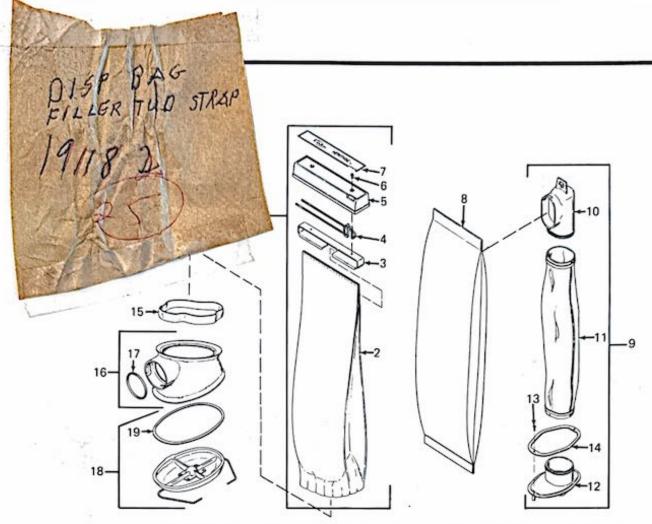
HERITAGE Sani-Em-Tor and bag group, with disposable bag, exploded view
